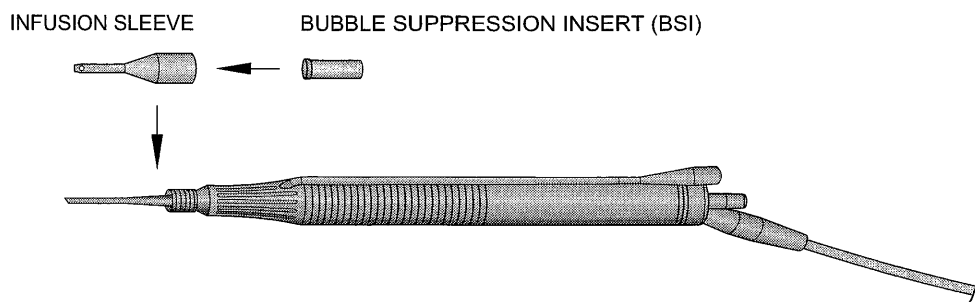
Infiniti*[®] U/S Handpiece shown with Infusion Sleeve and Bubble Suppression Insert
